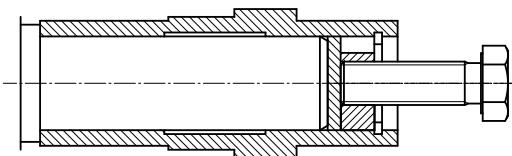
Gear unit mounted to shaft with a shoulder using the fastening element
